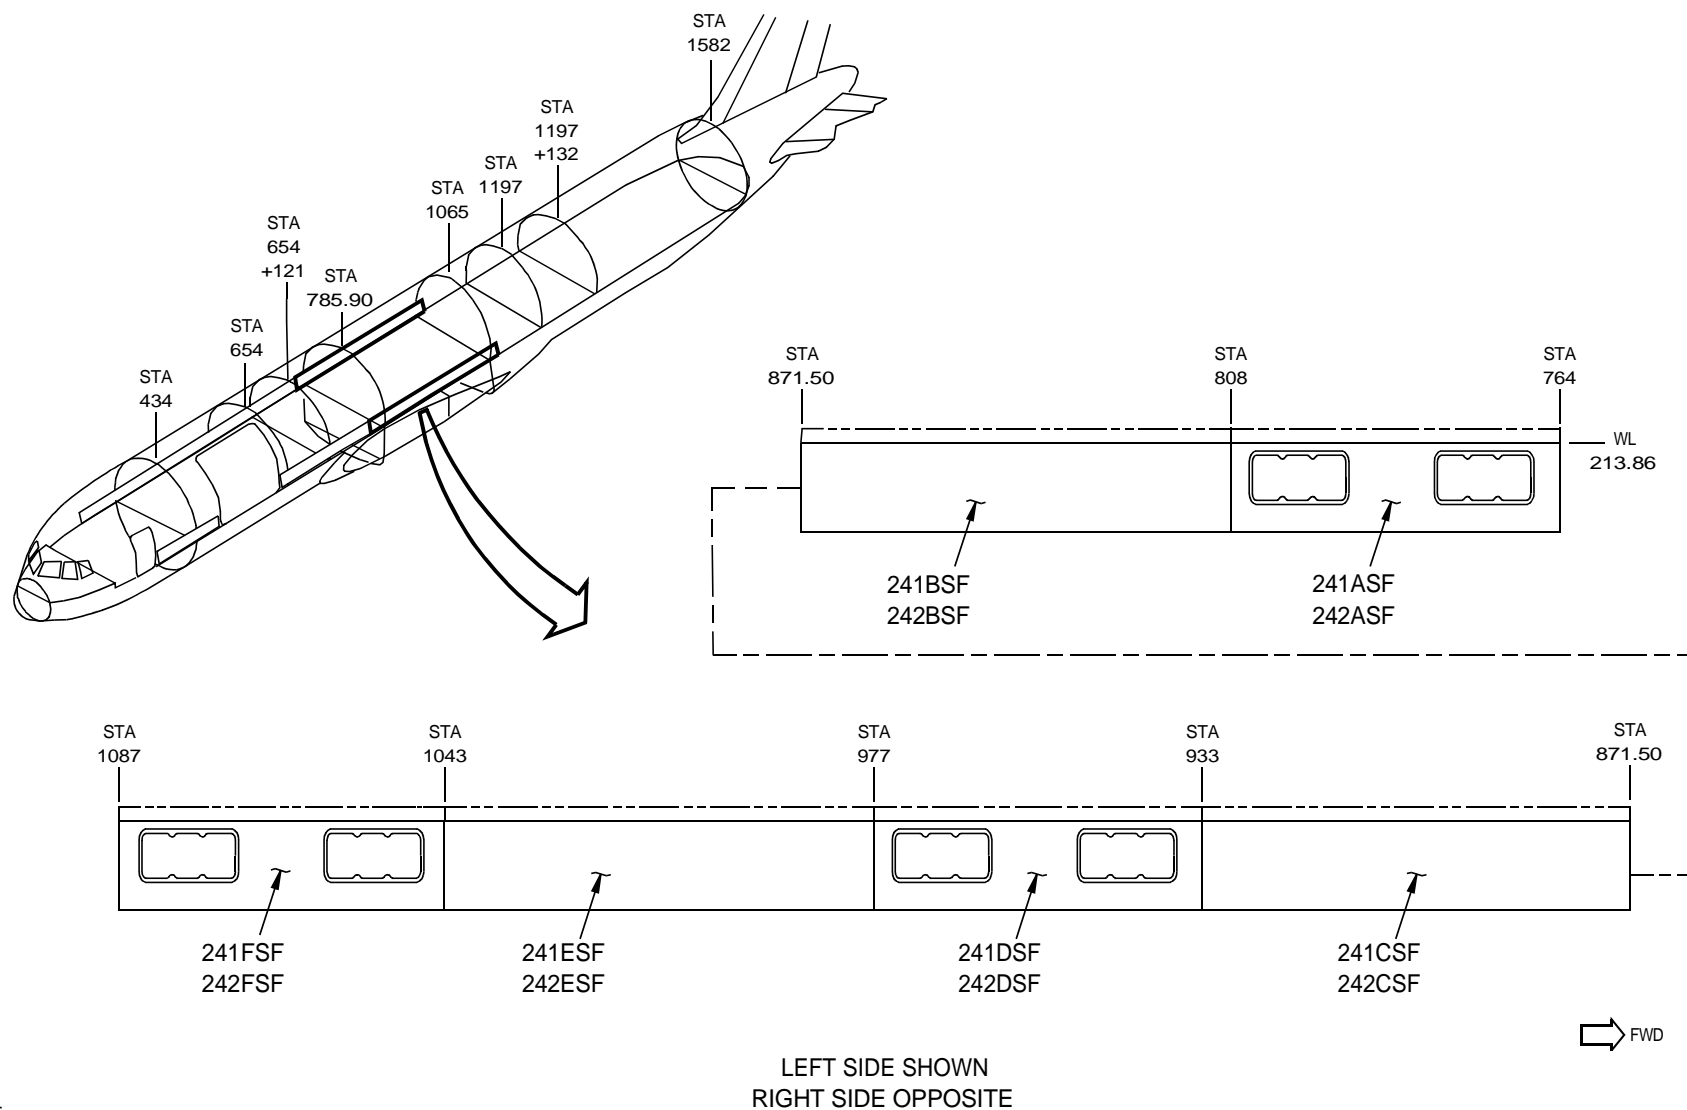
SUB-MAJOR ZONE 241/242 MAIN DECK SLOPING SIDEWALL PANELS - FREIGHTER
